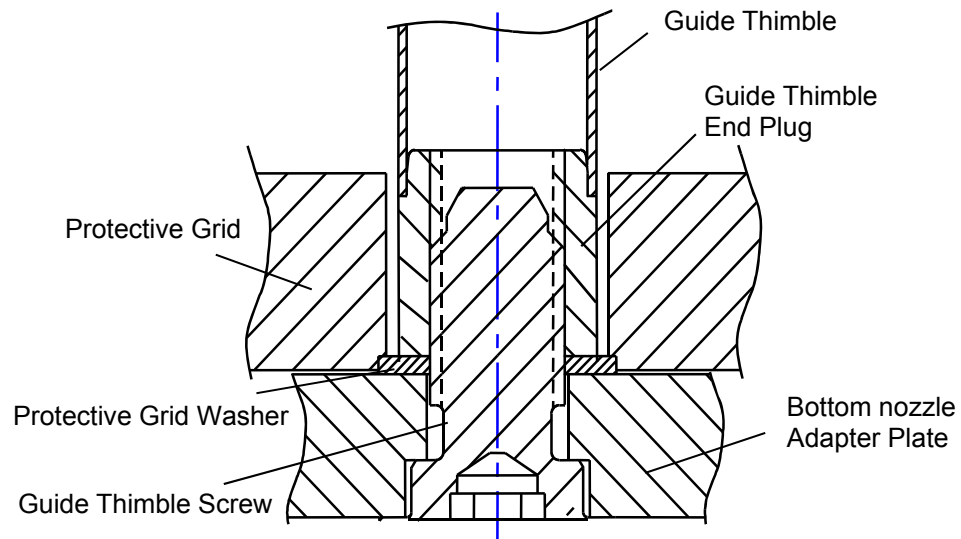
PLUS7 Bottom Nozzle and P-Grid/Guide Thimble Joint & Connection
